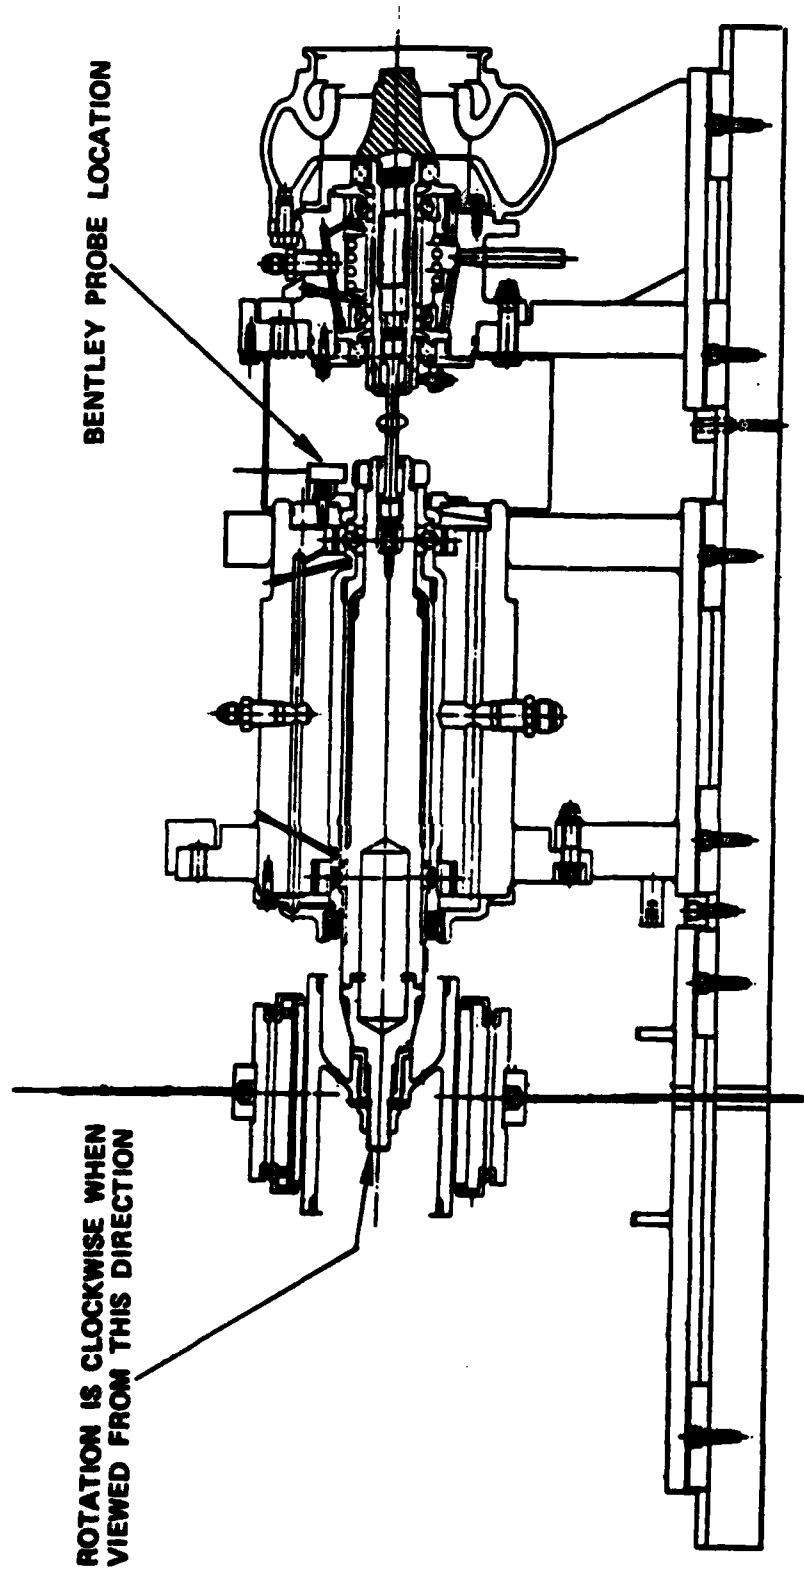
Test Rig Assembly Without Instrument Holder or Slip-Ring Assembly.
